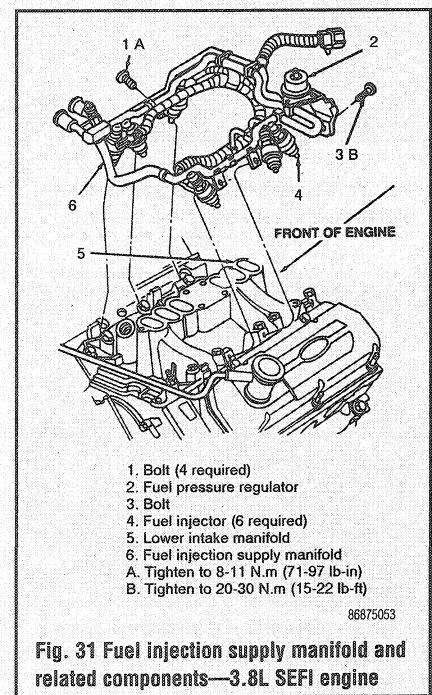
Fuel injection supply manifold and related components—3.8L SEFI engine
